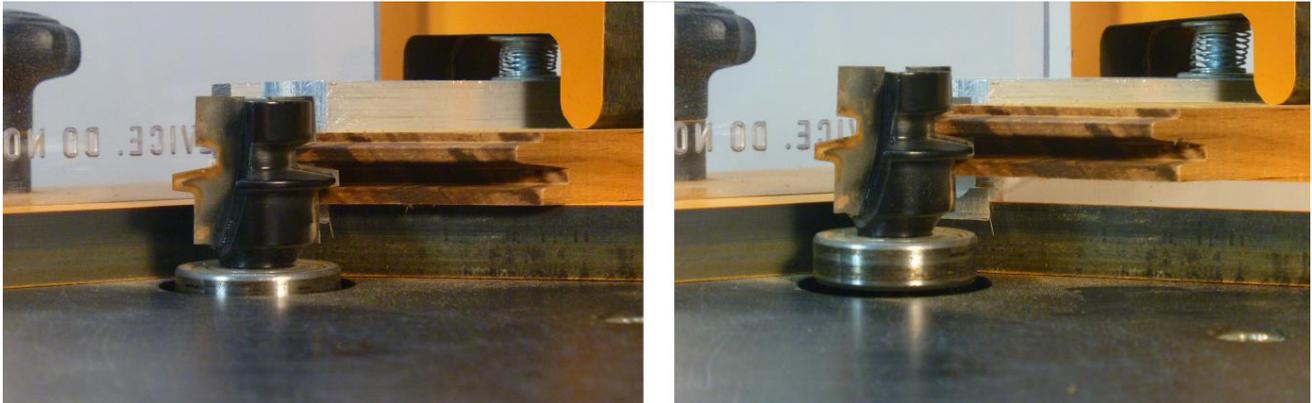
Cutting an interlocking mitre on a 12.5mm piece of timber with and without the packing piece
